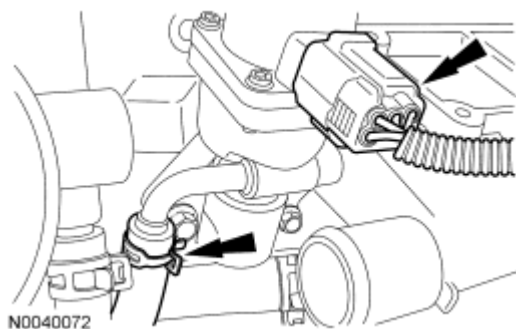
Locating Exhaust Gas Recirculation (EGR) Coolant Hose And Electrical Connector
